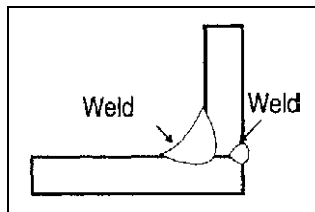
Corner weld from both sides — poor inside, good outside
